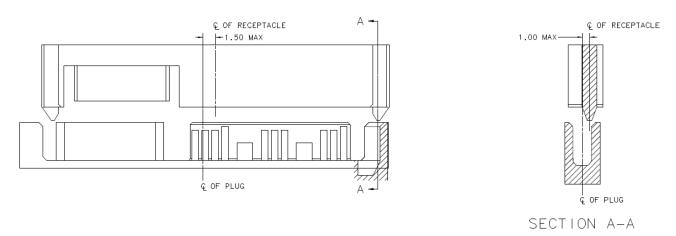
Combination Connector Pair Blind-Mate Misalignment Tolerance
